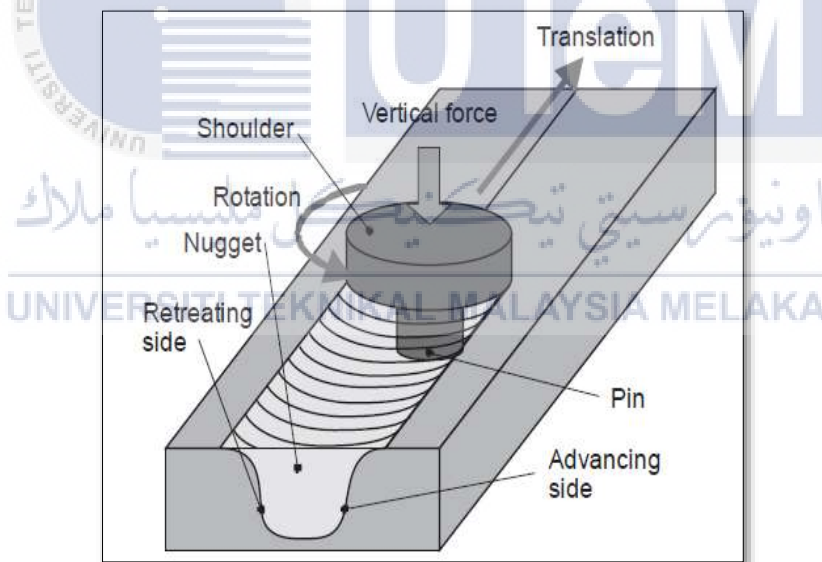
A Friction Stir Welding Schematic is depicted in this diagram (FSW)
